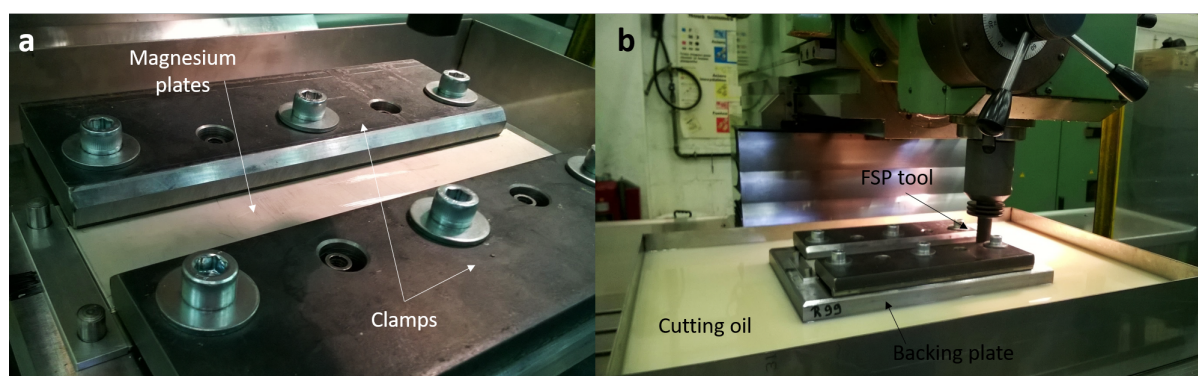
The two magnesium plates are tightly fixed to the backing plate with two clamps (a). The experiment was installed in a tank fulfilled with cutting oil in order to ensure the cooling of the backing plate and magnesium plates (b).
